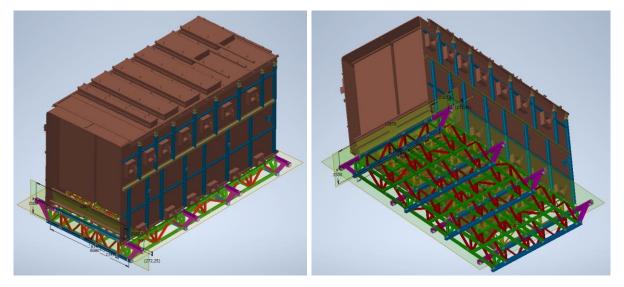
Inserted reference part in to 3D model of welded construction
